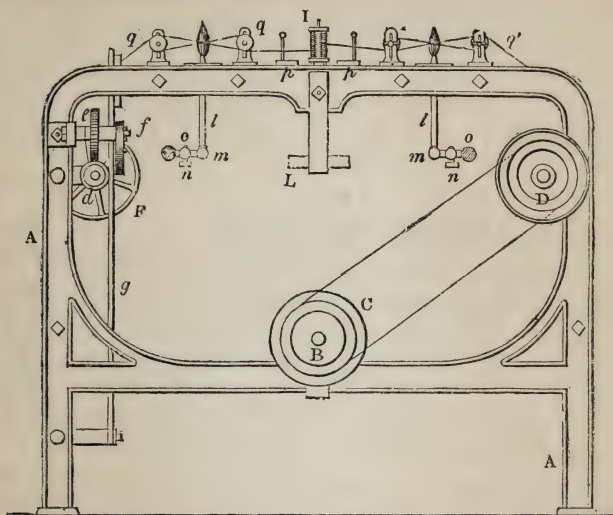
Thread Singeing or Gassing Machine. End View. Scale, three-fourths of an inch to the foot.
